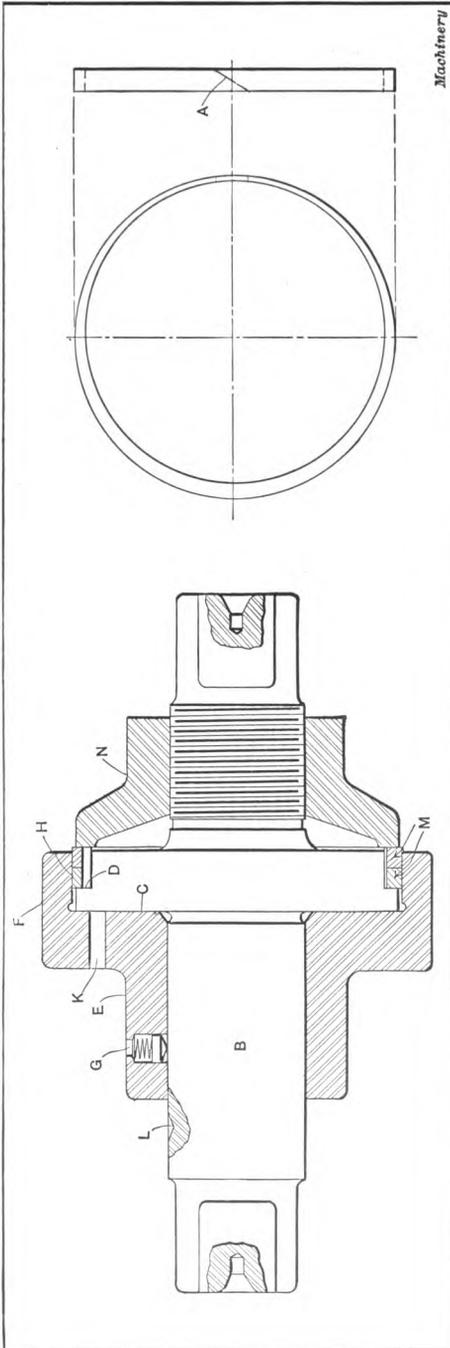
Arbor for compressing and holding Split Packing Rings while grinding.
